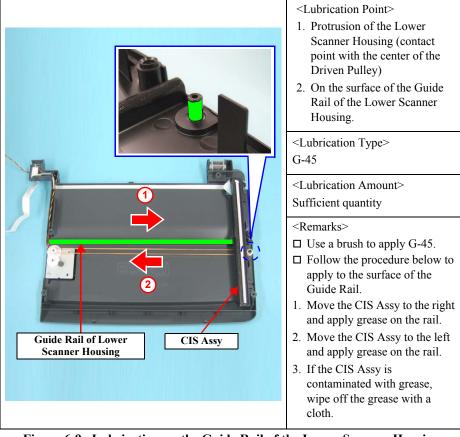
Lubrication on the Guide Rail of the Lower Scanner Housing
